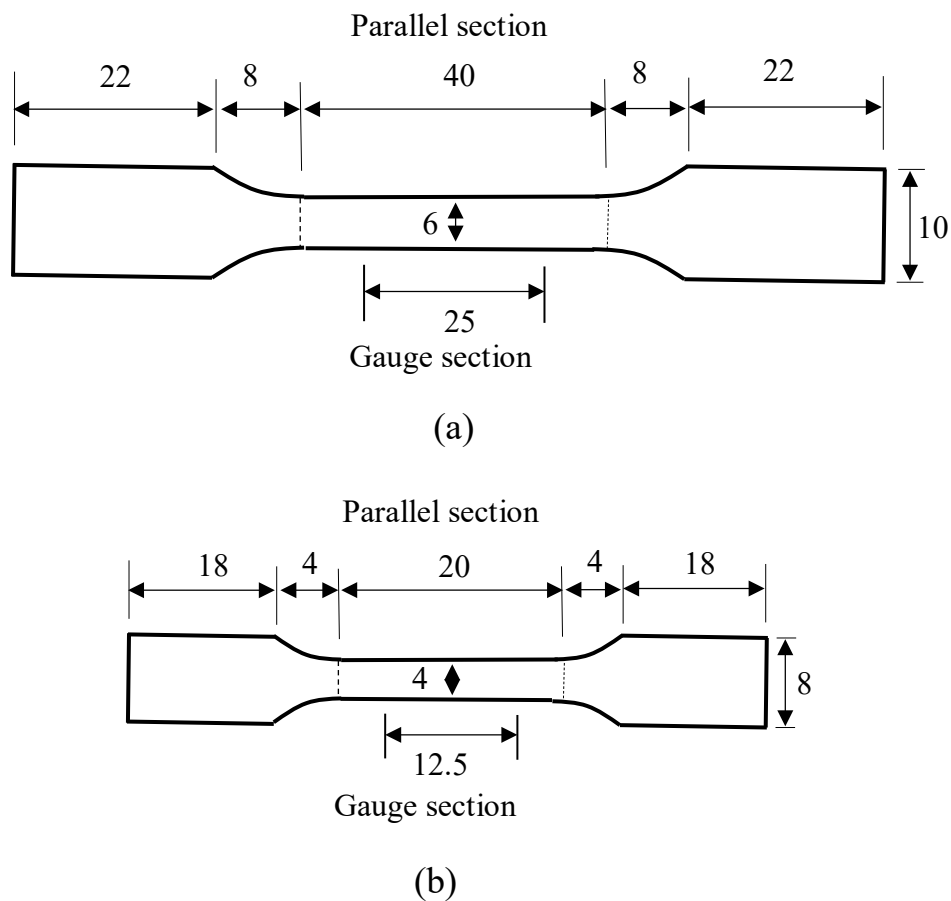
Schematic drawing of specimen dimensions (a) standard size test specimen dimensions extracted from Type 316H-cast 55882 stainless steel. (b) sub-size test specimen dimensions extracted from Type 316H-cast 69431 and Esshete 1250 stainless steels.
